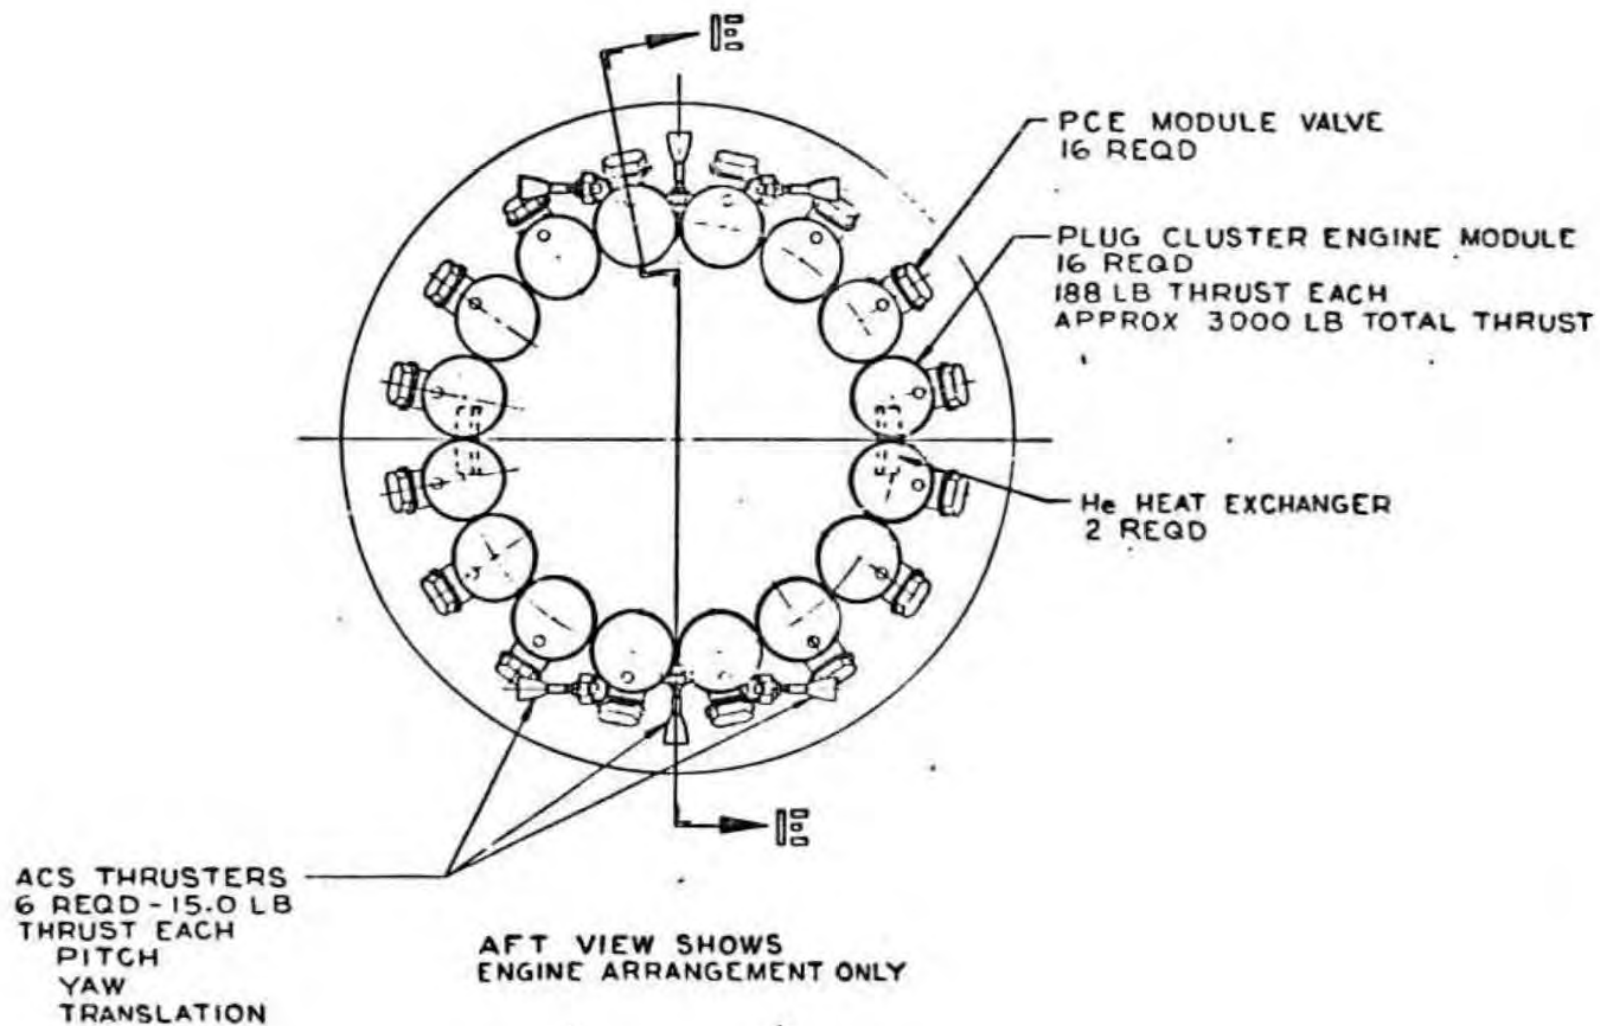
N₂O₄/PAAB-1 Plug Cluster Engine (Rear View)
